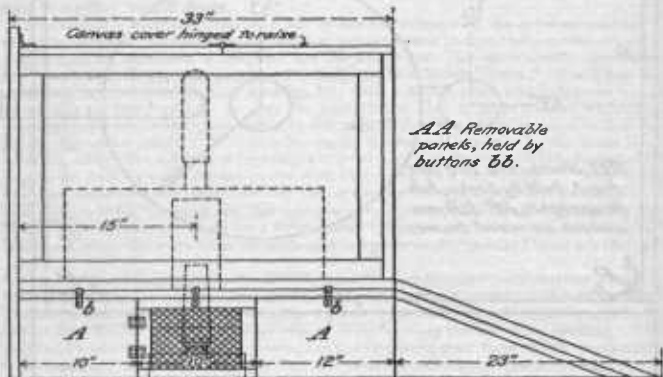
End elevation of brooder. Note sloping run to floor, hinged cover, removable side panel AA on base of brooder. In the center of this is a small door made of $\frac{1}{4}$ -inch mesh galvanized wire. Through this door the lamp is withdrawn for filling and cleaning. The panel AA is removed when the brooder is dismantled, and the whole superstructure is then packed away under the base.
